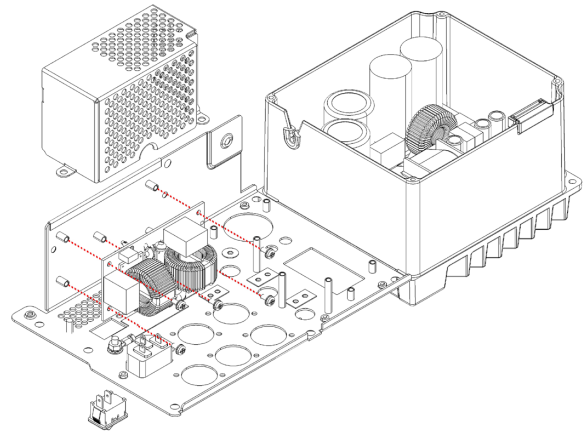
AC line filter board assembly to amplifier chassis
